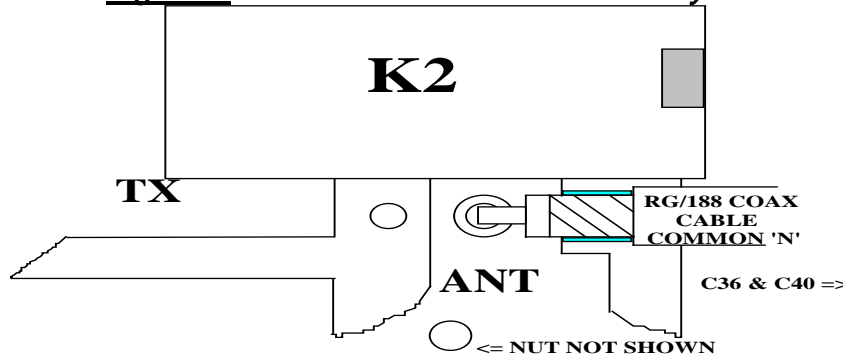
Coaxial Cable mounting on PCB shaded areas are solder points
